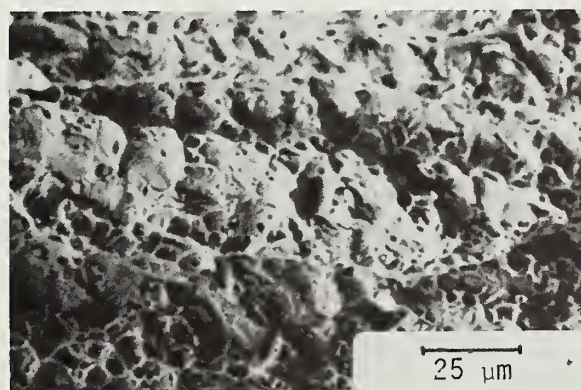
SEM fractograph of a 308L flux - core - metal - arc weldment.
